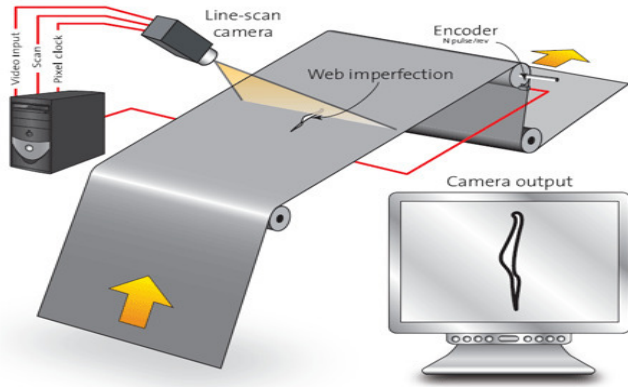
Surface inspection system of steel strip based on machine vision
